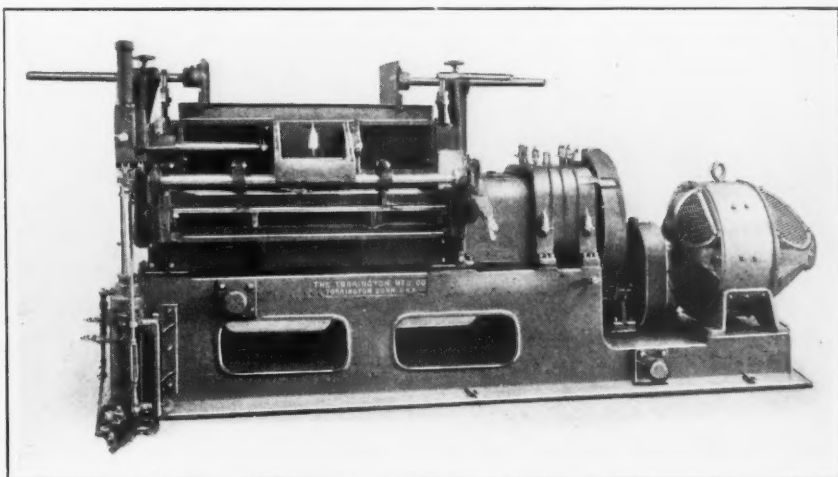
Coiling Machine Equipped with an Air-operated Coil Ejector
